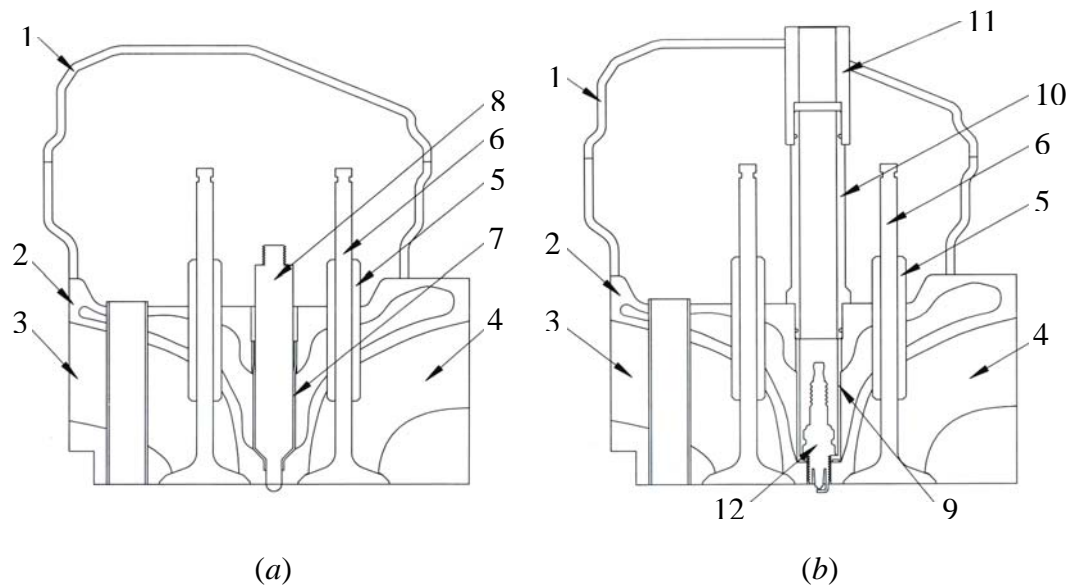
Cut-away view of the modified cylinder head: (a) before modification, and (b) after modification; the twelve part layout: (1) valve cover, (2) cylinder head, (3) intake port, (4) exhaust-port, (5) valve guide, (6) exhaust valve, (7) diesel-injection nozzle guide, (8) diesel injection nozzle, (9) sparkplug guide, (10) middle-sparkplug rod guide, (11) upper sparkplug rod guide, and (12) sparkplug.
